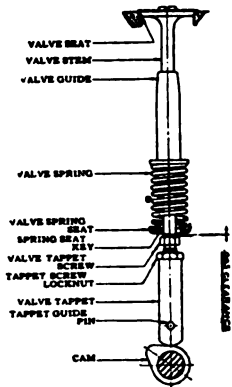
A valve and its parts. Ford valve has no tappet adjustment.
